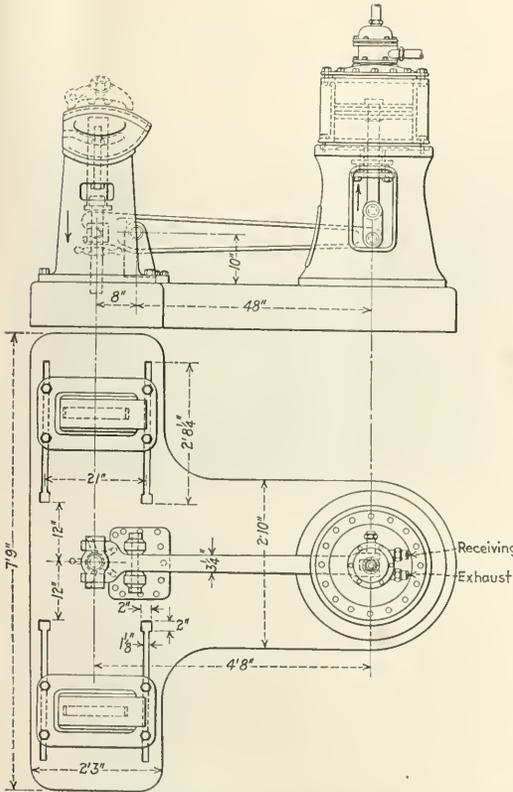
Brake Beam Testing Machine, 75,000 lb. Capacity
